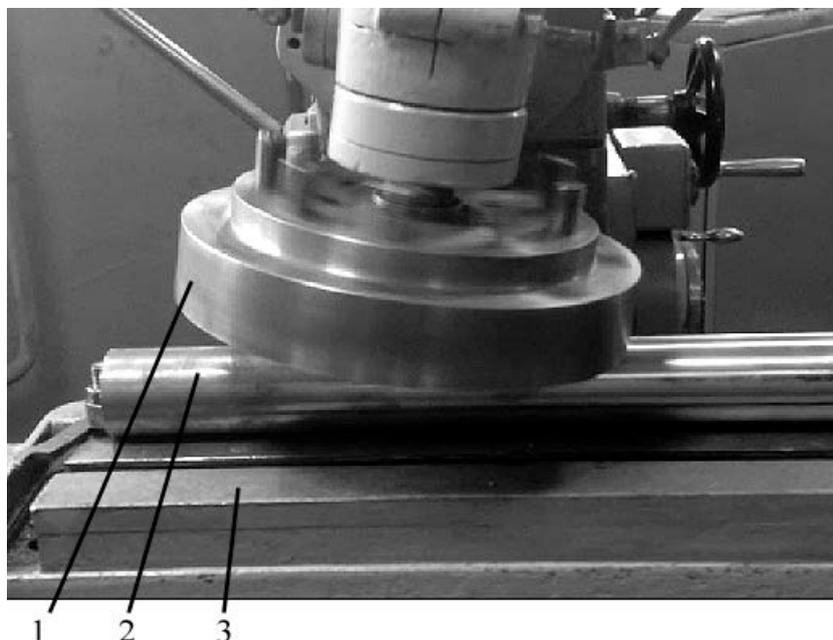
Antifriction sample treatment on the vertical milling machine: 1 – instrument for antifriction treatment; 2 – cylindrical sample; 3 – table of the vertical milling machine
